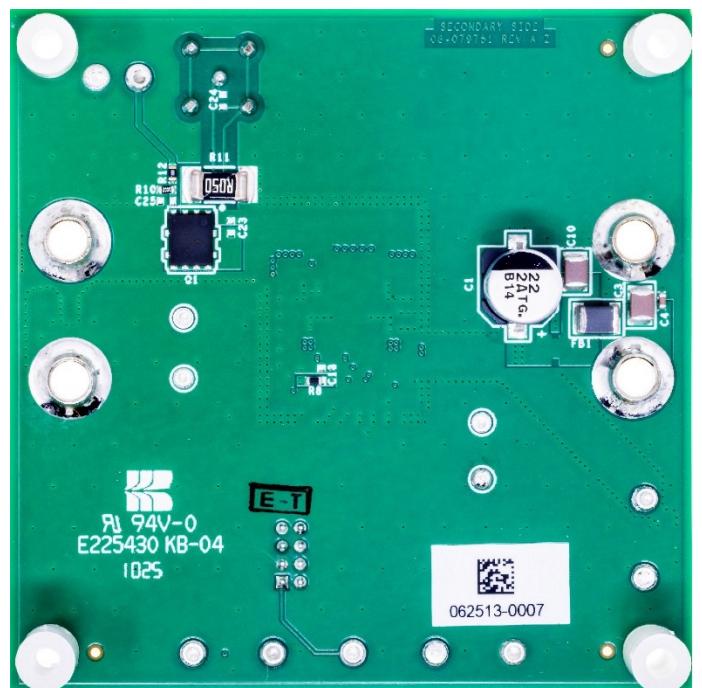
EVAL-LT8647-AZ Board Photo Back View
